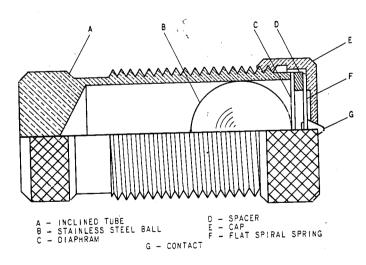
Barrel Contact Assembly for Directional Unit and Instantaneous Overcurrent Unit
